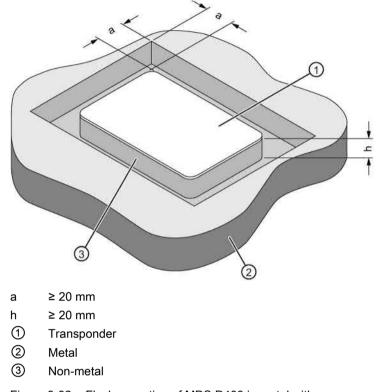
Flush-mounting of MDS D400 in metal with spacer
